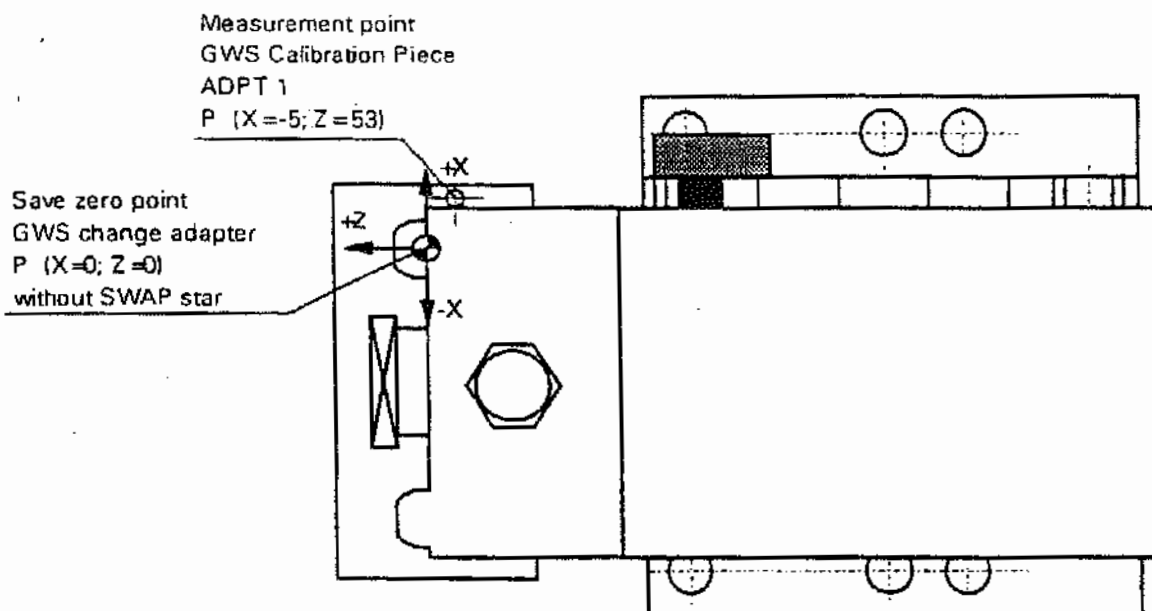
Zero point on GWS change adapter for longitudinal tools
